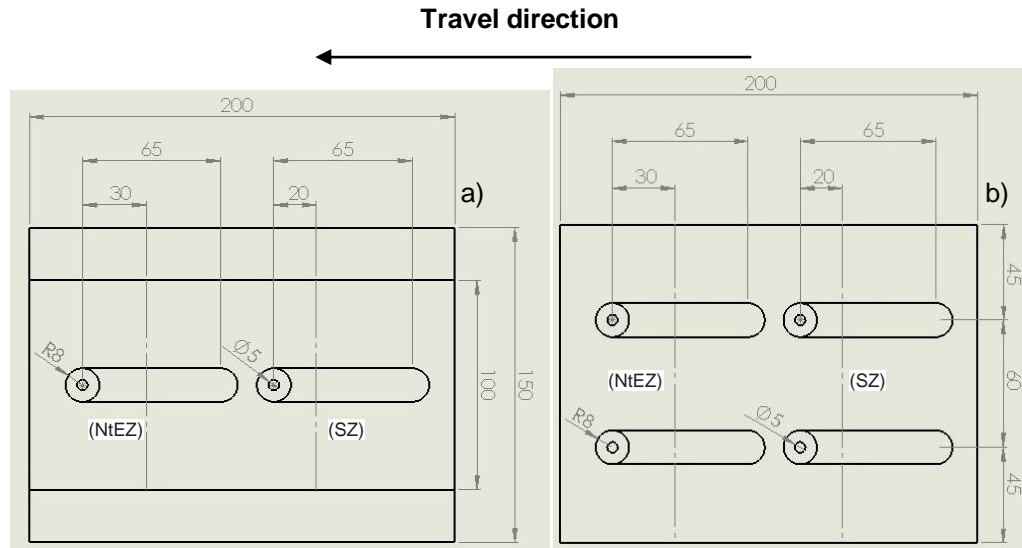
Drawing of the FSDP joints for metallography (dimensions in mm) (a) type 1 and (b) type 2.
